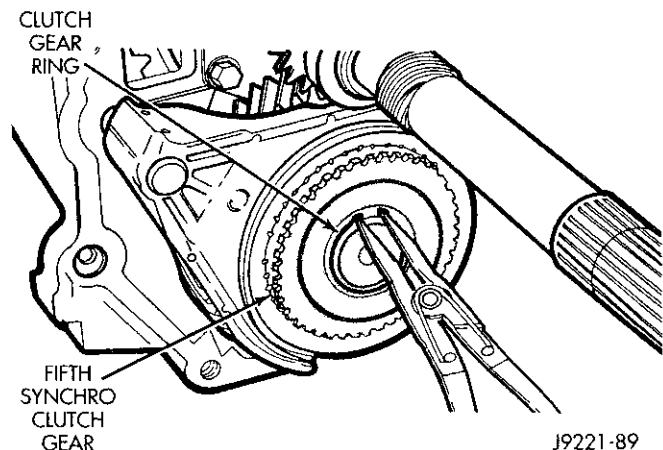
Removing Countershaft Fifth Speed Clutch Gear Snap Ring
